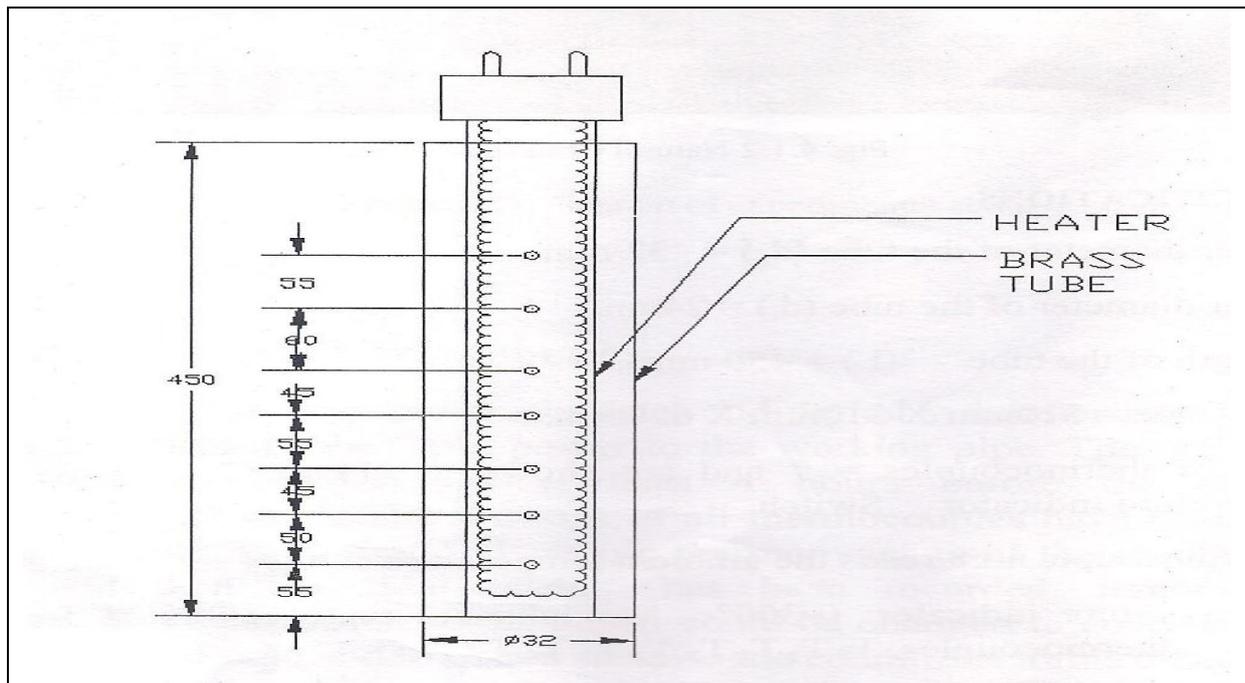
Heater assembly for vertical cylinder(Dimensions are in mm)
